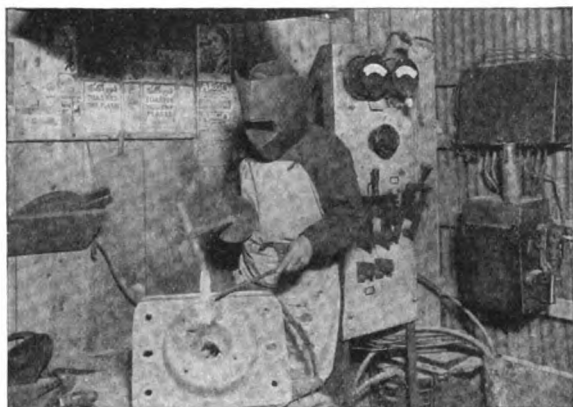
Carbon Electrode Welding. The operator holds the carbon electrode with the right hand and feeds the filling metal in to the weld from a rod held in his left hand
